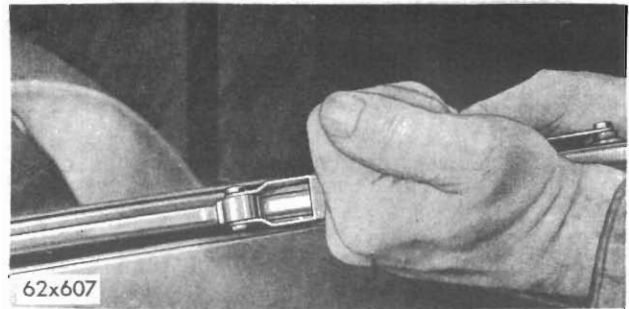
Locking windshield or rear window weatherstrip (typical view)
